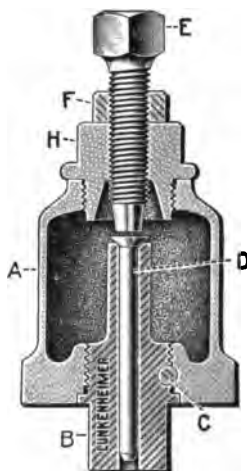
SEC. 10gg.—Lunckenheimer locomotive main and side rod oil cup. The feed is regulated by movement of rod *D*, which operates a valve. The lift of the valve is limited by the screw *E*.
